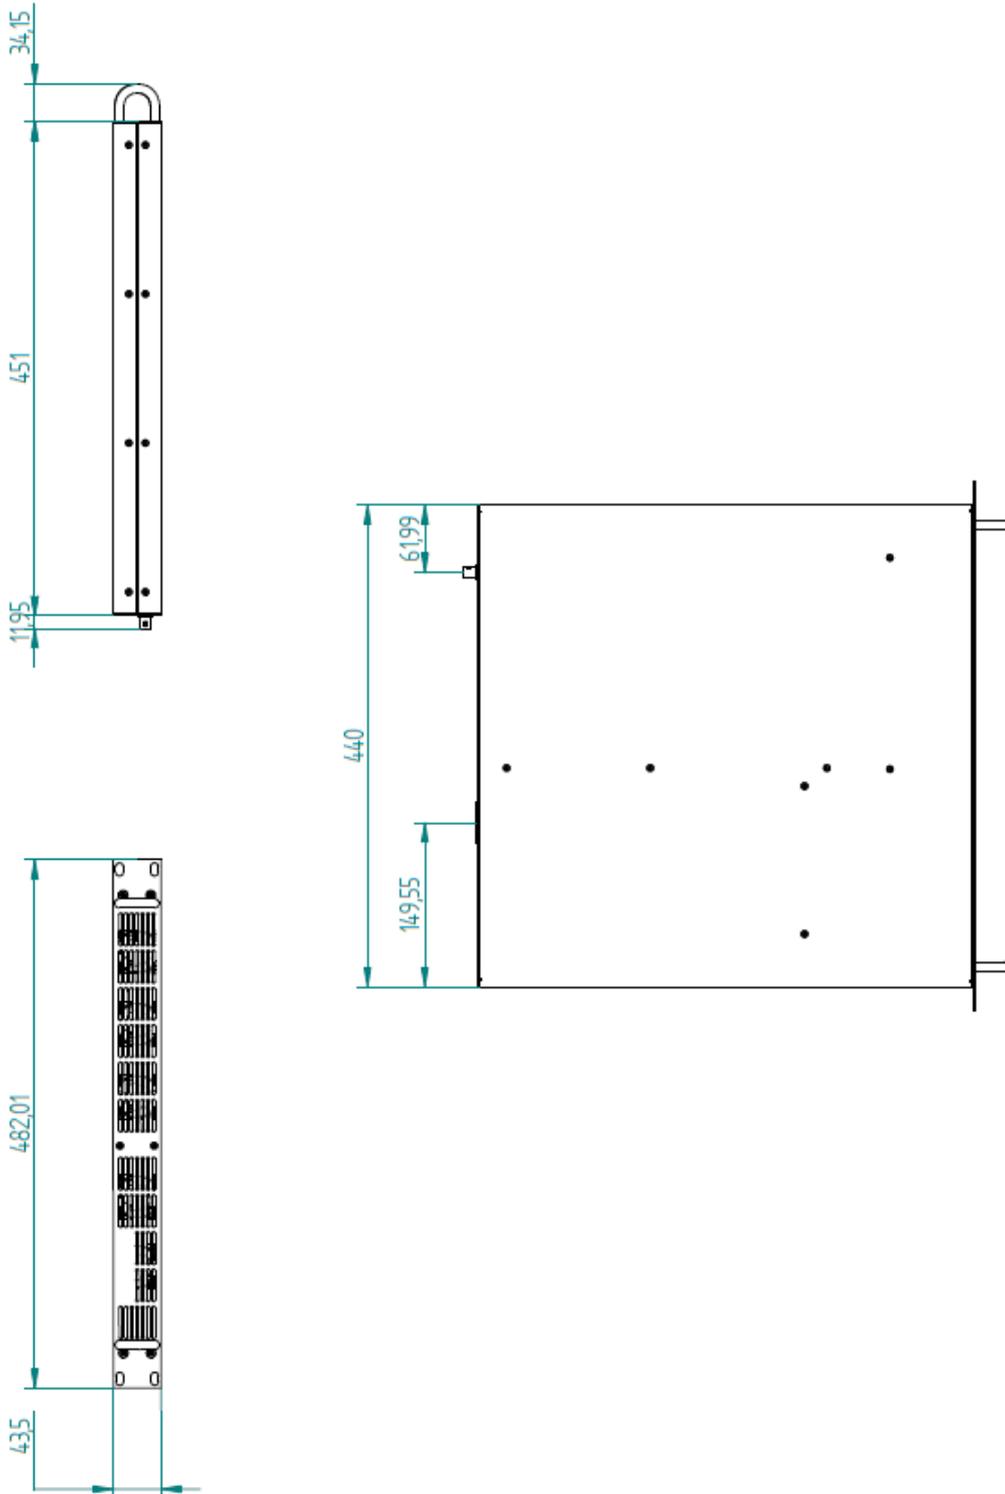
F1K5D4100015/F1K5D4050030 Mechanical Drawings
